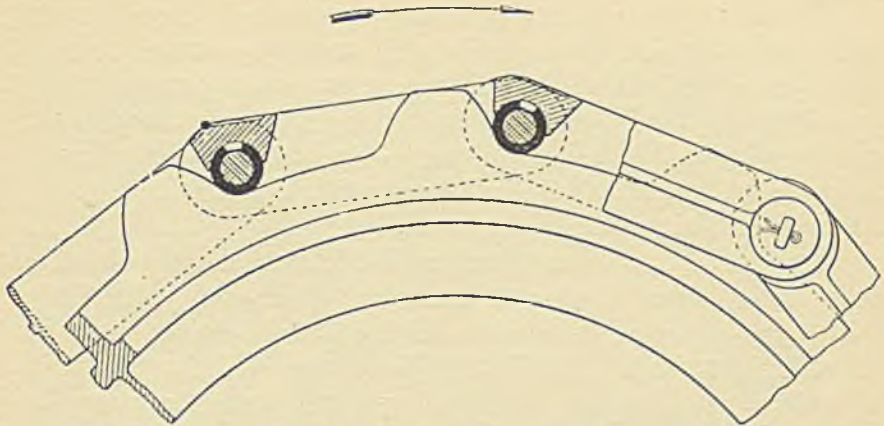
Ley Bushed Chain on Segment of Sprocket Wheel.
